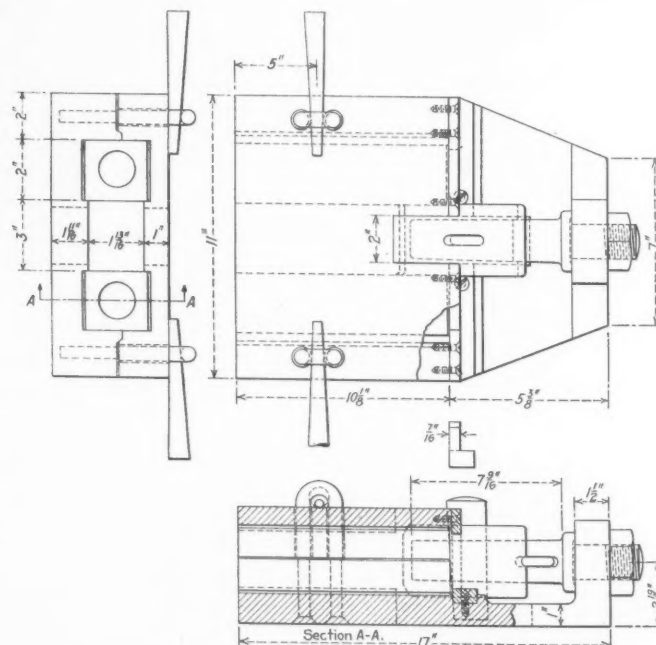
Fixture for Babbitting Valve Stem Crossheads
